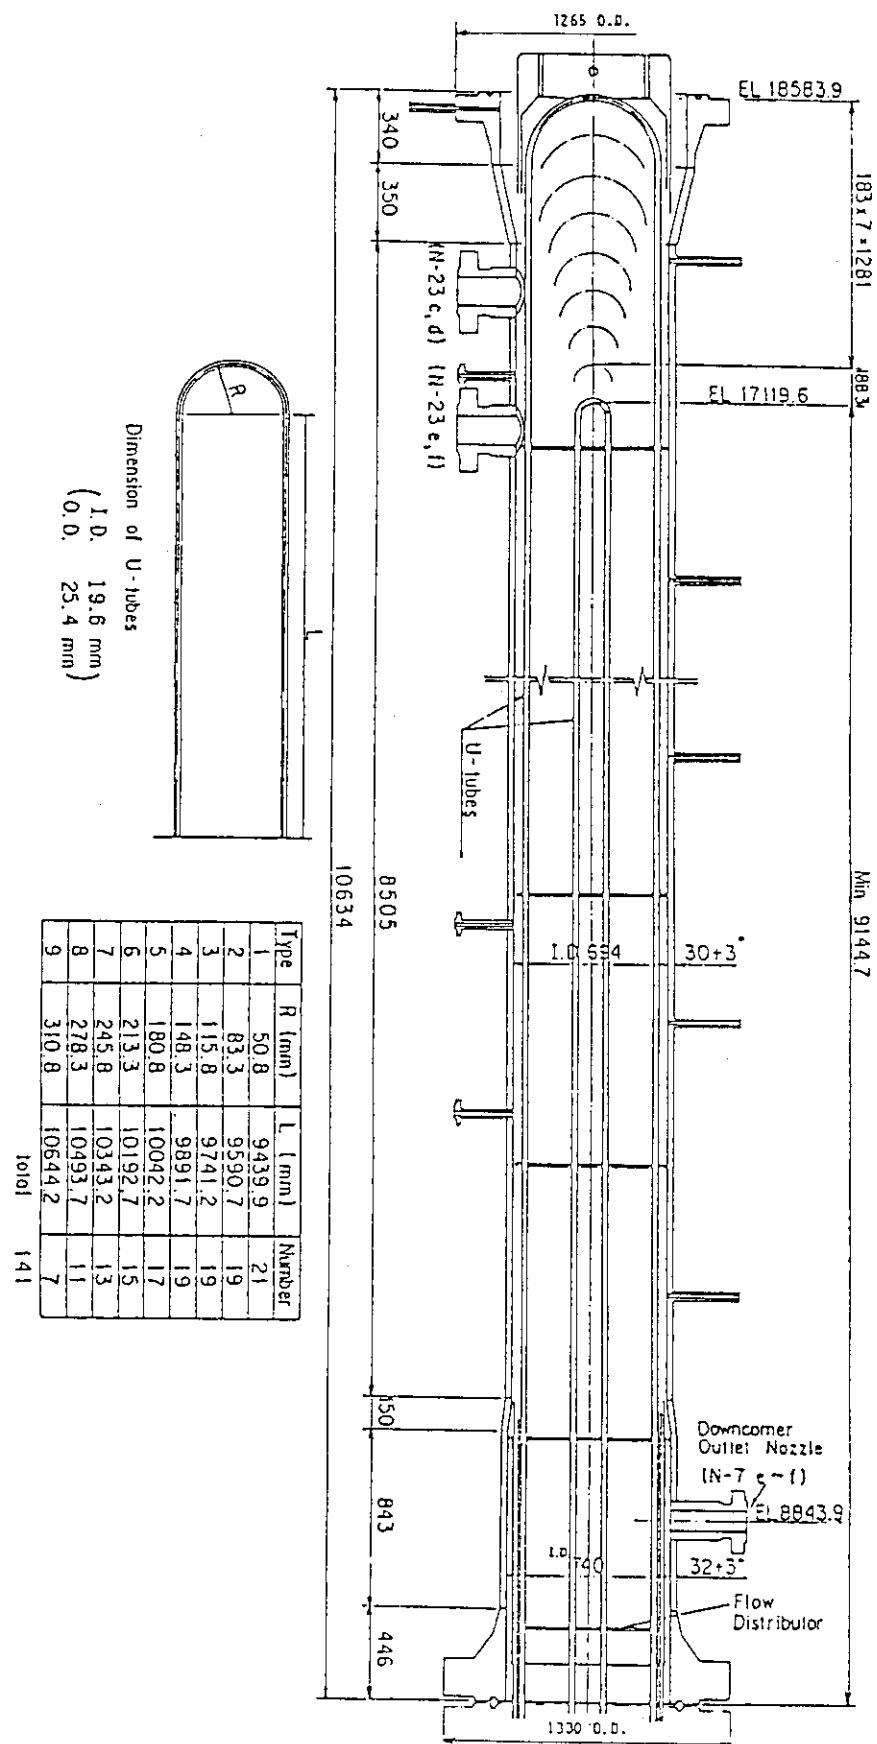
(a) Details of Middle Part of SG Vessel and U-tubes
